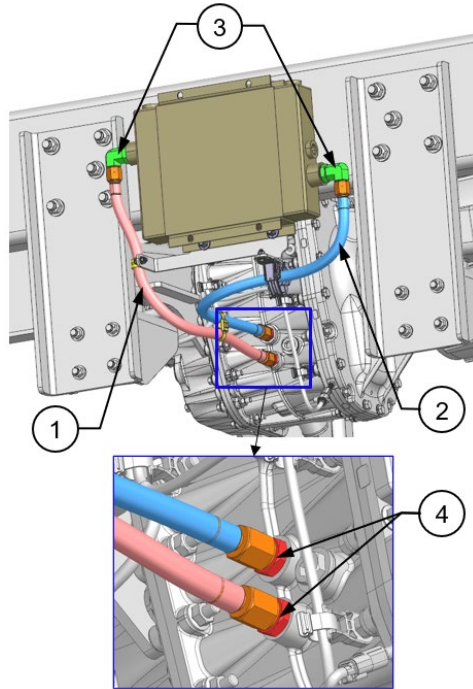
Diagram of old hose layout. Parts 1 and 2 are the hoses. Part 3 are the 90* fittings. Part 4 (Shown in Red) are the straight adapter fittings. Hose ends are colored orange.
